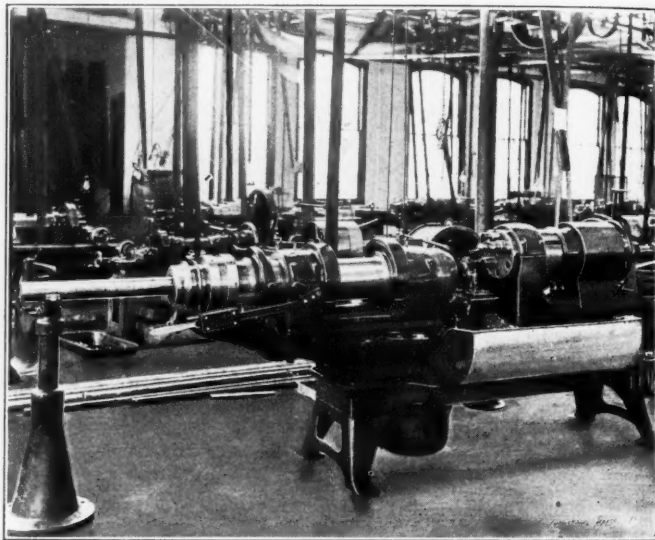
The Largest Automatic Screw Machine ever built; Operates on a 6-inch Bar.
